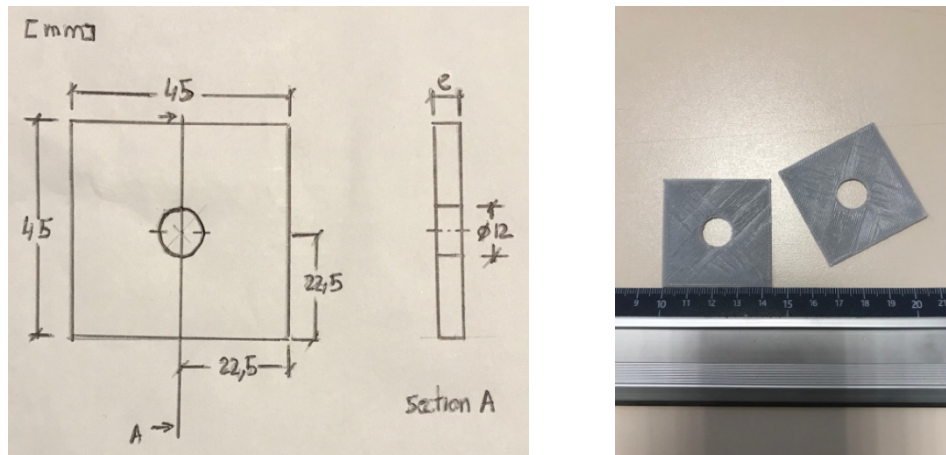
Holder's design sketch (a). Holders 3D printed (b)
